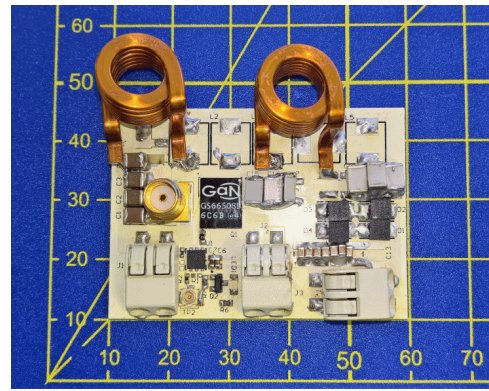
Photograph of the implemented Class E DC/DC converter. The dimensions of the aluminium-core PCB are 50 mm X 35 mm X 1.5 mm.
